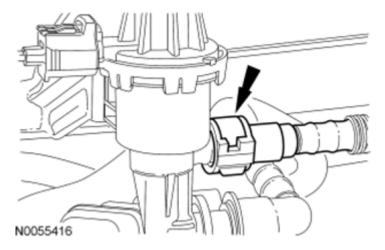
Locating Upper Evaporative Emission Tube Courtesy of FORD MOTOR CO.
